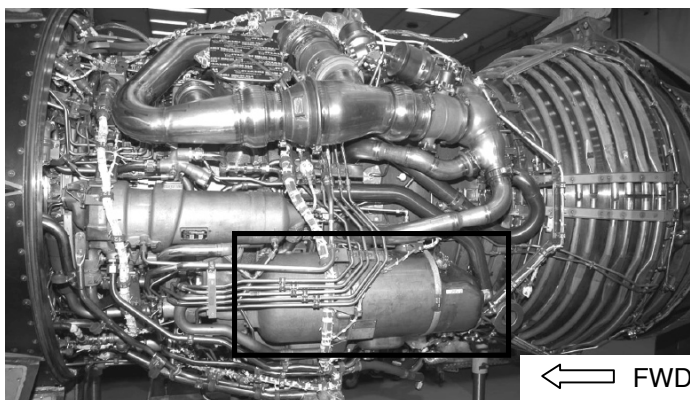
The oil tank of a PW4000 on the core engine-mounted accessory gearbox. All connections to the lubrication system are integrated into the gearbox (LTT)
